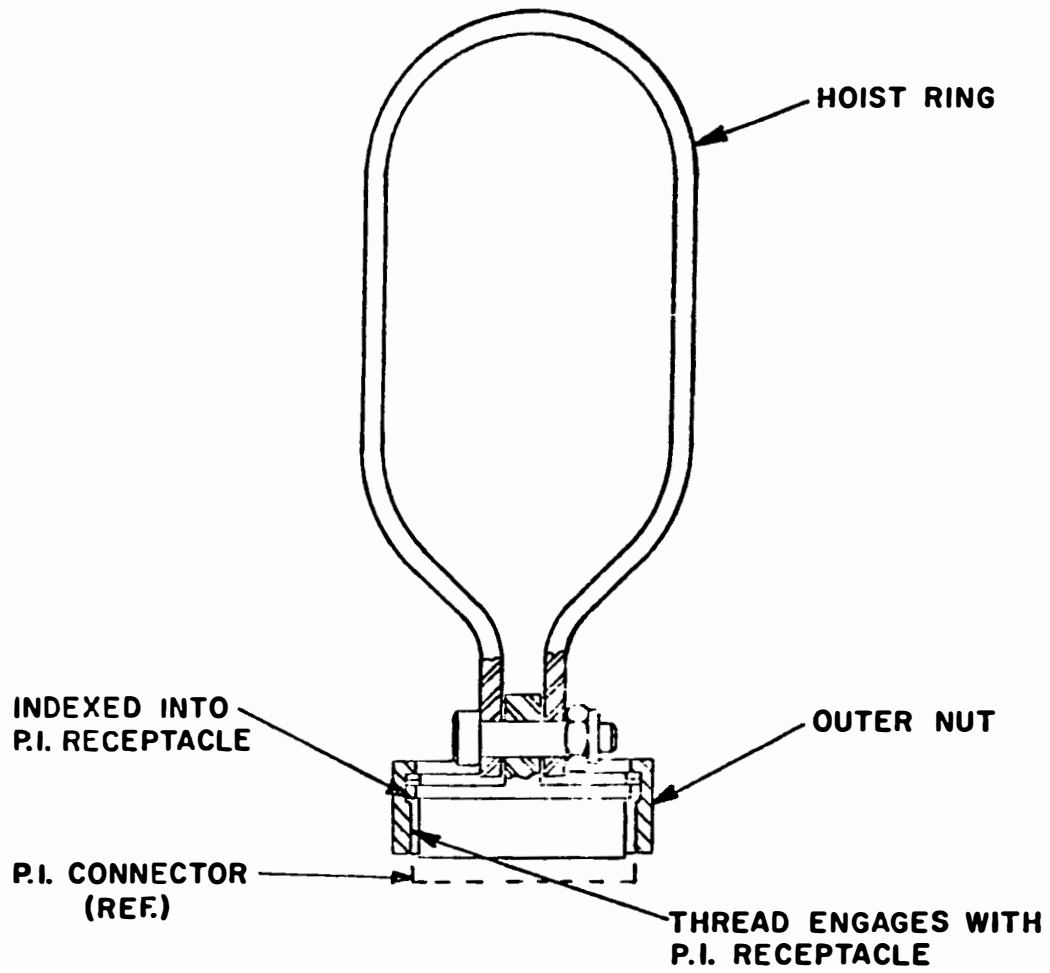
P.I. LIFTING TOOL, 703724-1143
